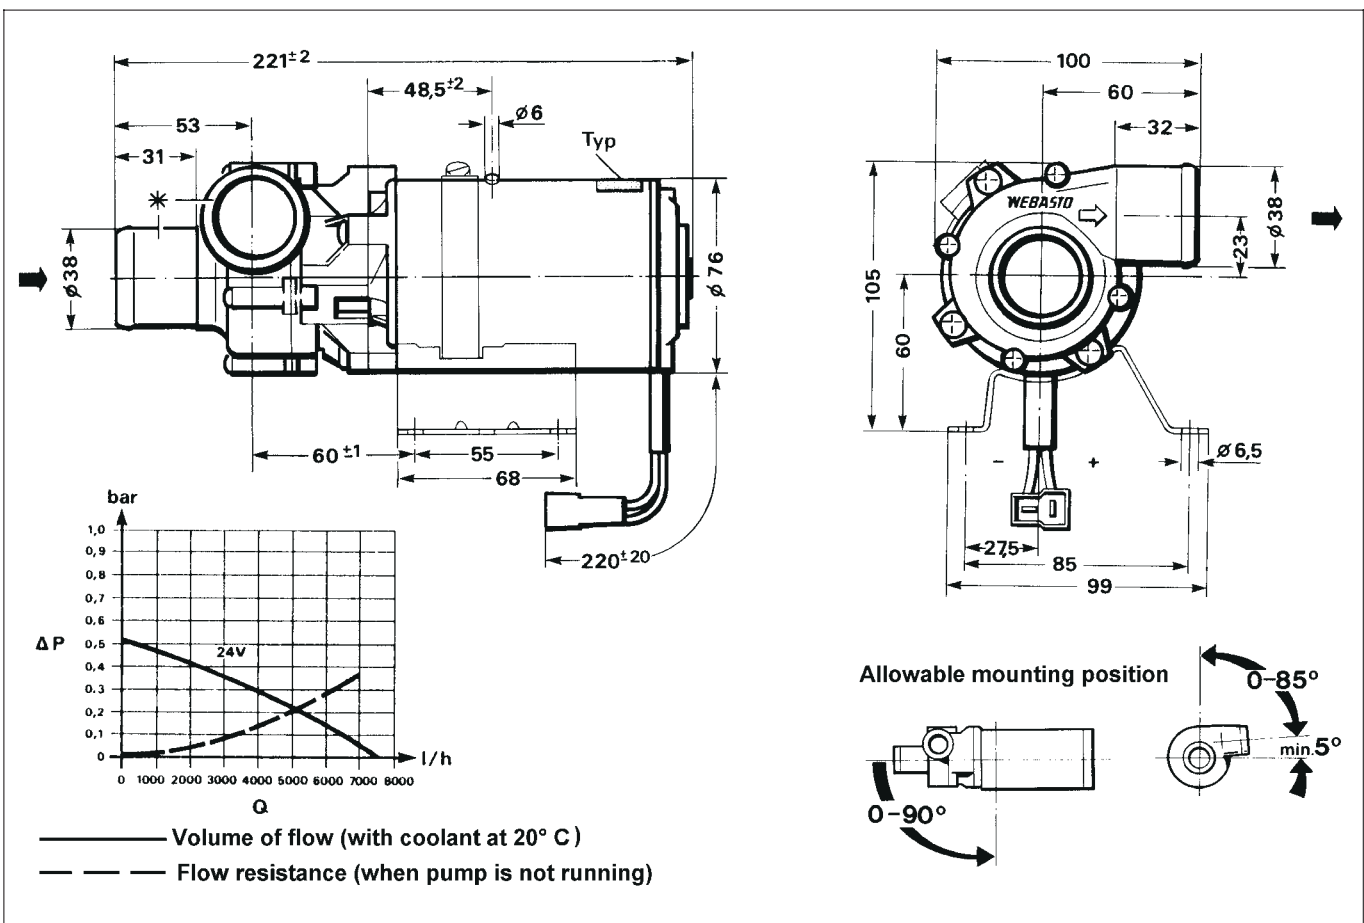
Coolant Circulating Pump Assembly - U 4814
